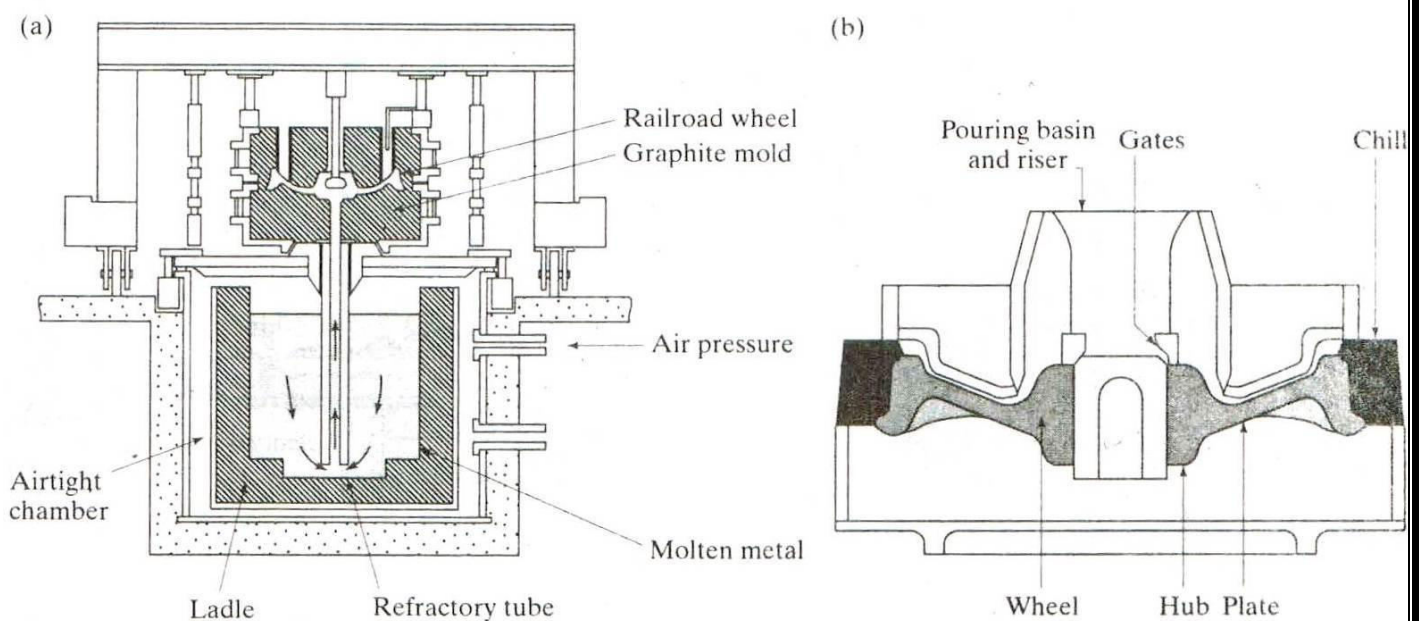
(a) The bottom-pressure casting process utilizes graphite molds for the production of steel railroad wheels. (b) Gravity-pouring method of casting a railroad wheel.
